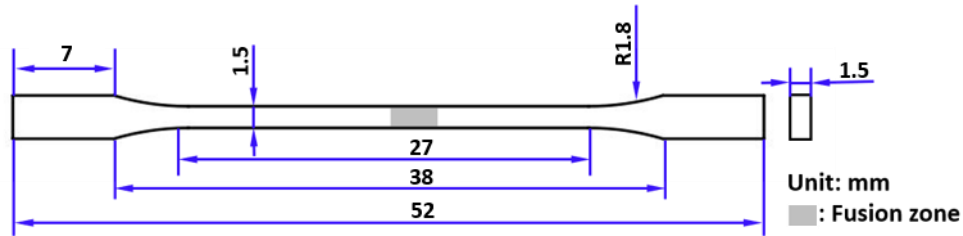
Geometry and dimensions of gas metal arc welded specimens used for uniaxial tensile testing.
